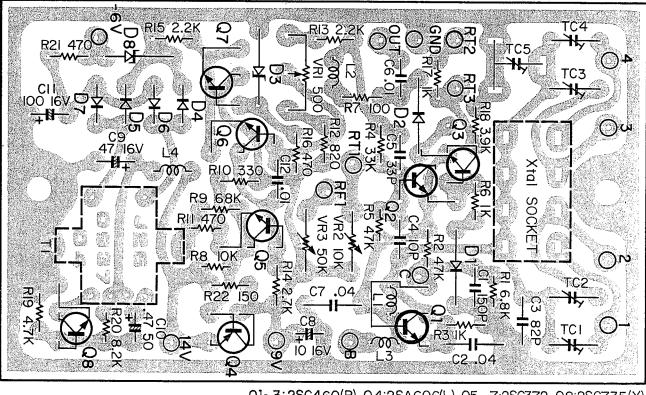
DRIVER COIL Board (X40-0017-01) Diagram
